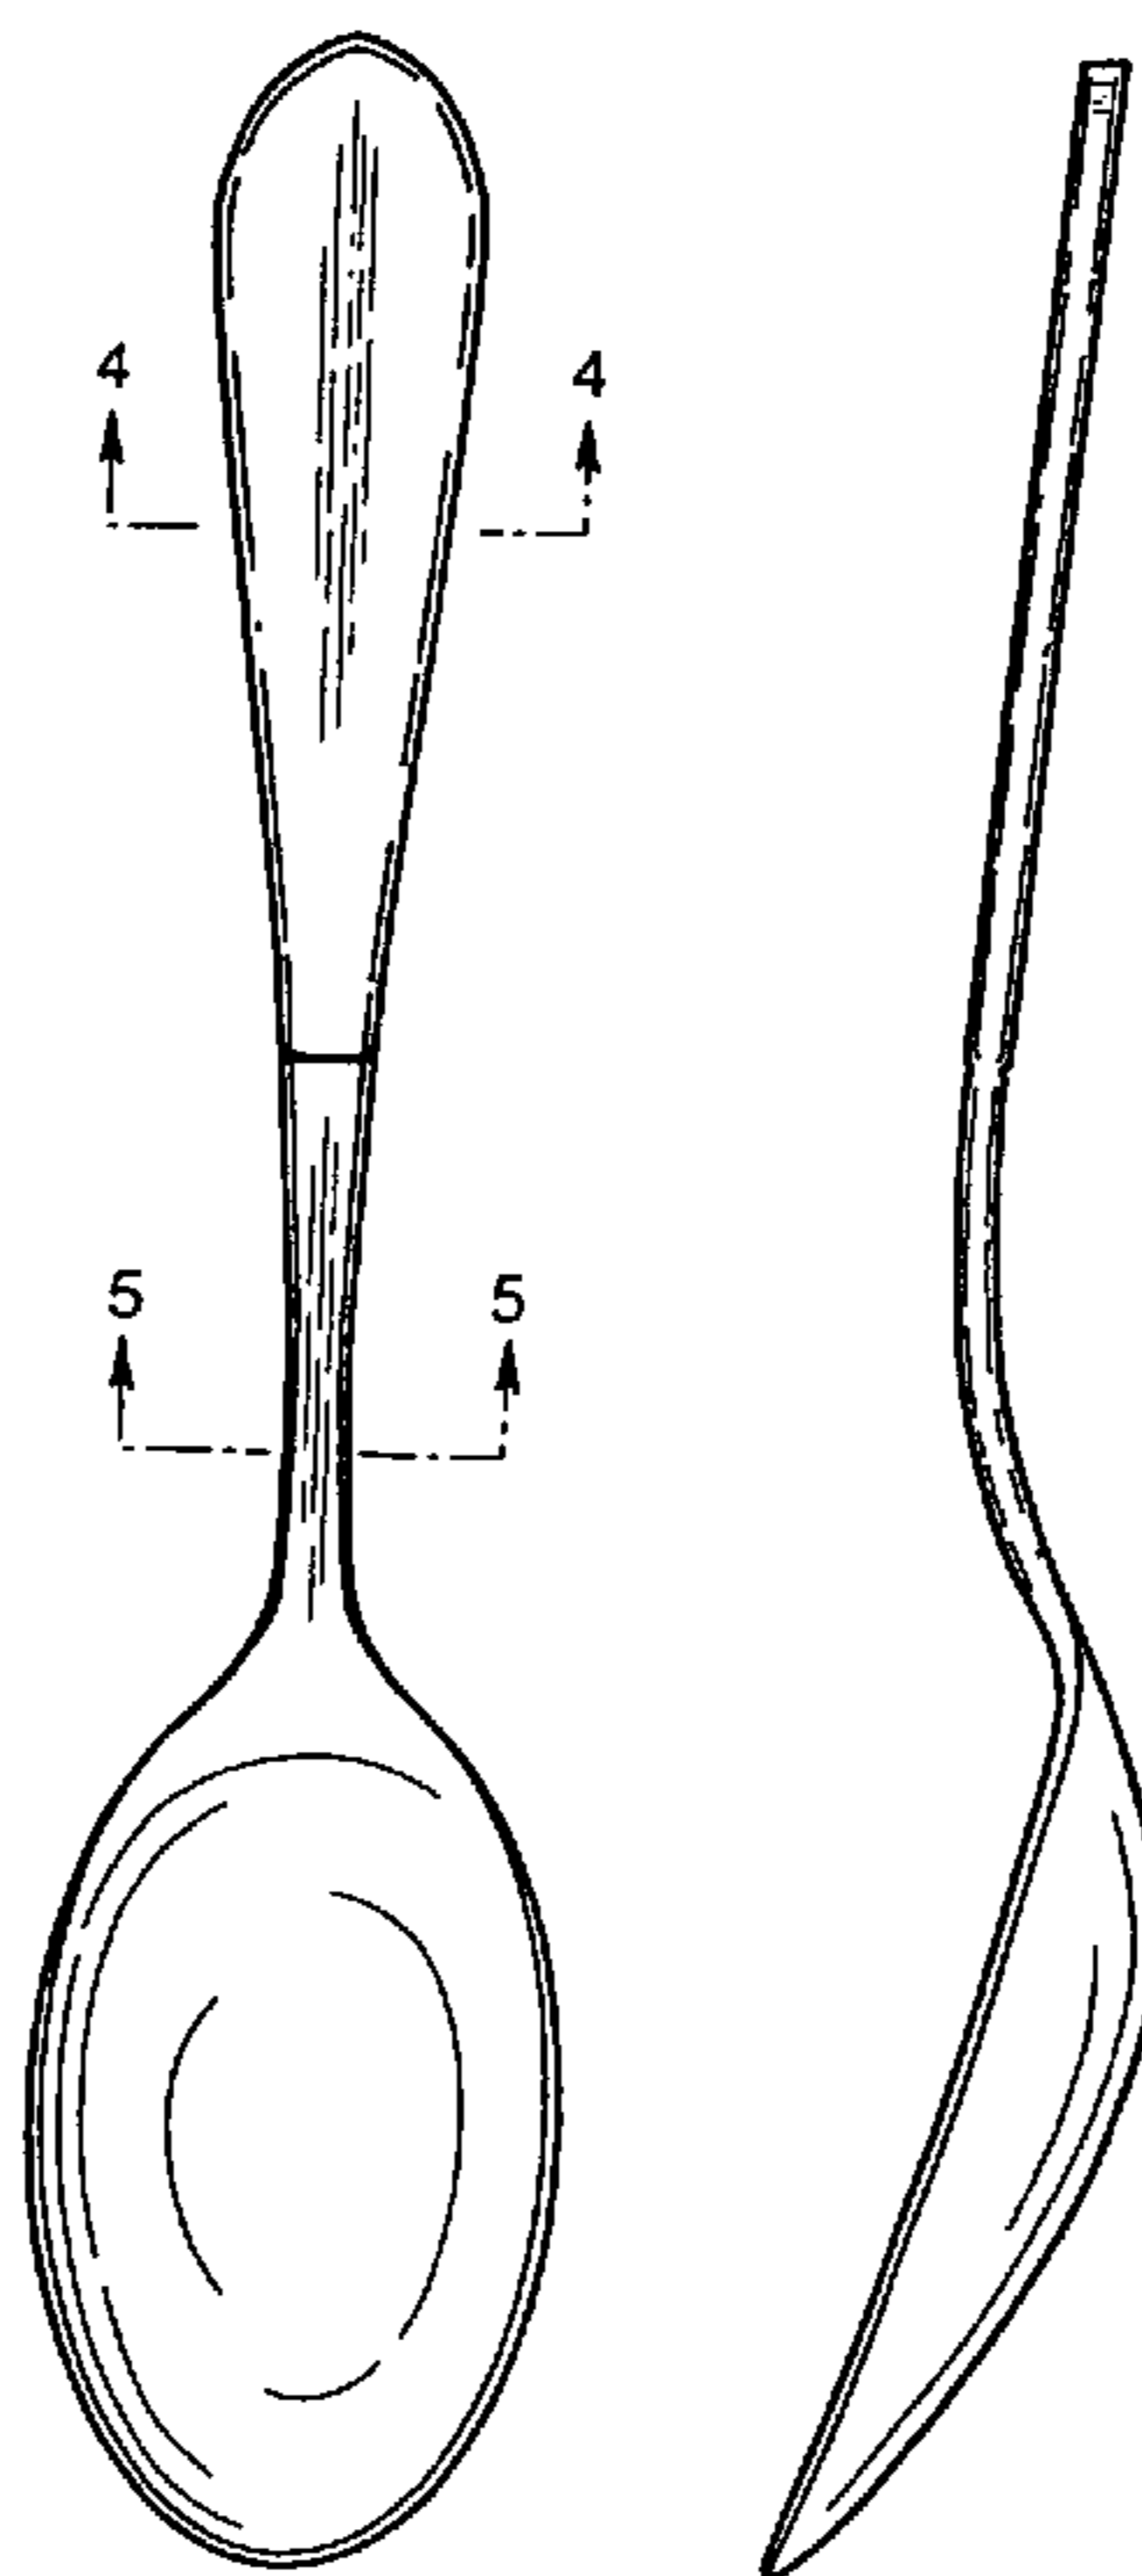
is a top view of a spoon, illustrating my new Design; FIG. 2 is a right side view thereof; the left side view being a mirror image;
